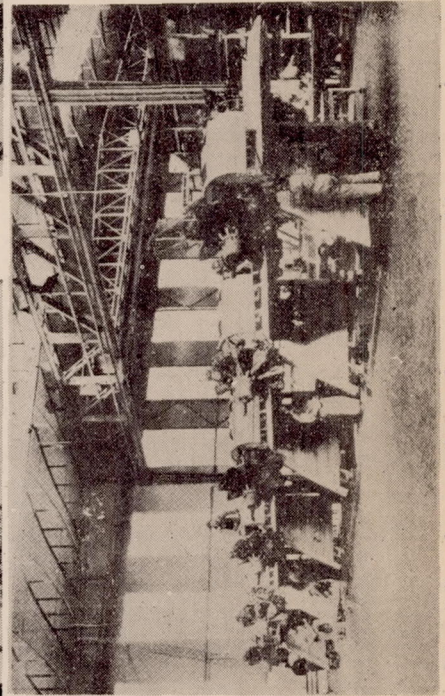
Assembly of six nacelles equipped with Jupiter engines.
